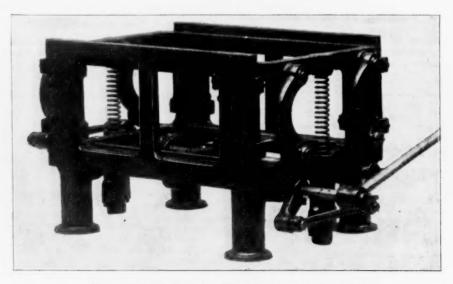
Bare Machine with Parts in Position to make the Mold.
